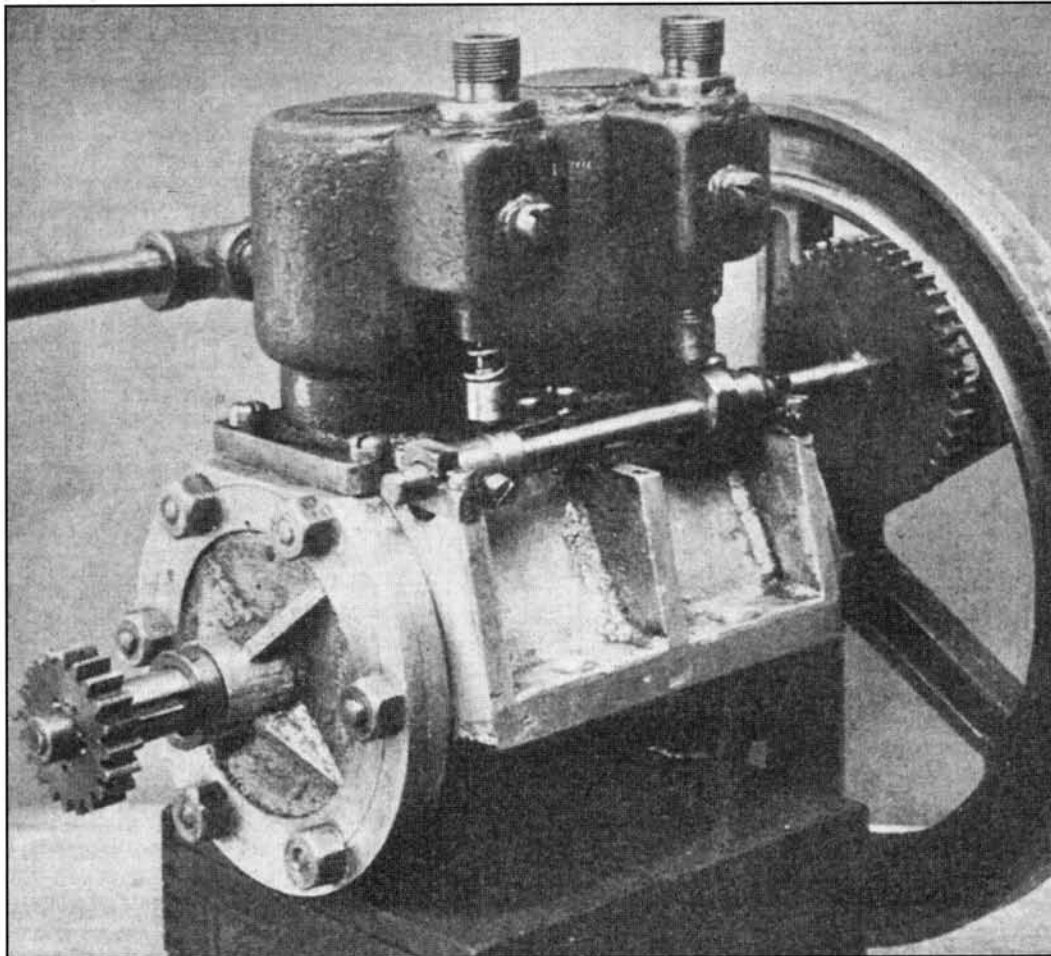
Photograph Of The Cam Shaft Side Of Mr H. R. Ricardo's High-Speed Engine.
